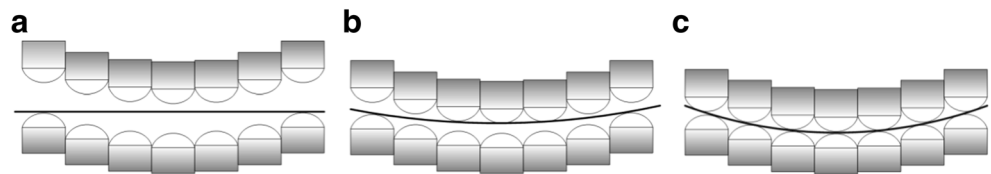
Multi-point die. a Start forming. b Partial forming. c End forming
